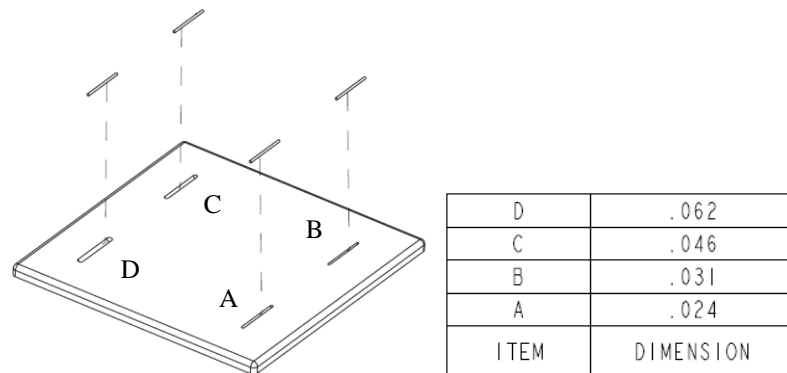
Layout and Groove Diameters of Thermoforming Breadboard
